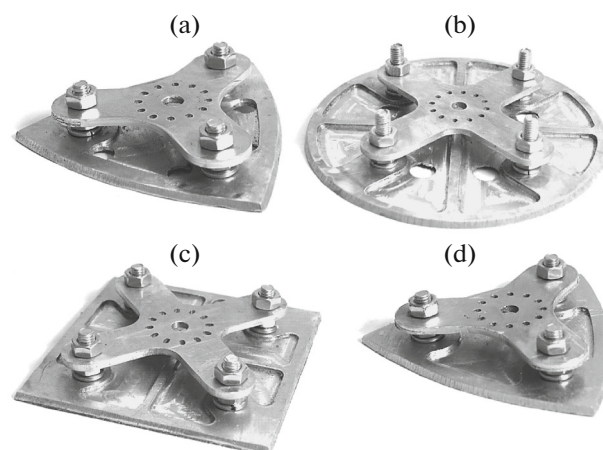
New grinding-plate designs: (a) deltoid plate with chip exit holes; (b) round plate with chip exit holes; (c) square plate without chip exit holes; (d) deltoid plate without chip exit holes.
